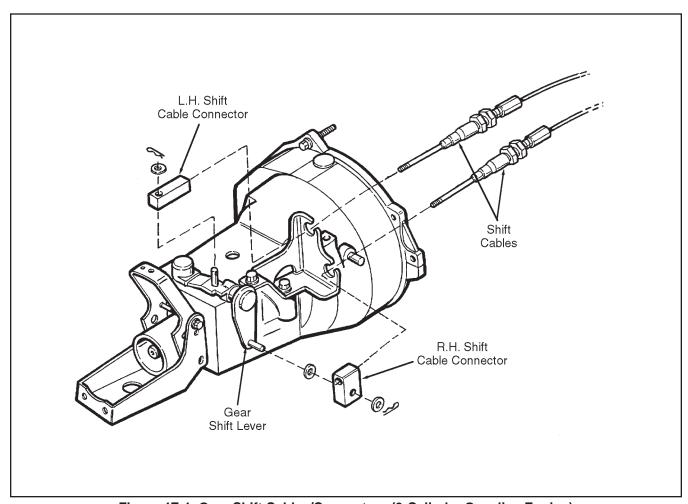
E-1. Gear Shift Cables/Connectors (3-Cylinder Gasoline Engine)
